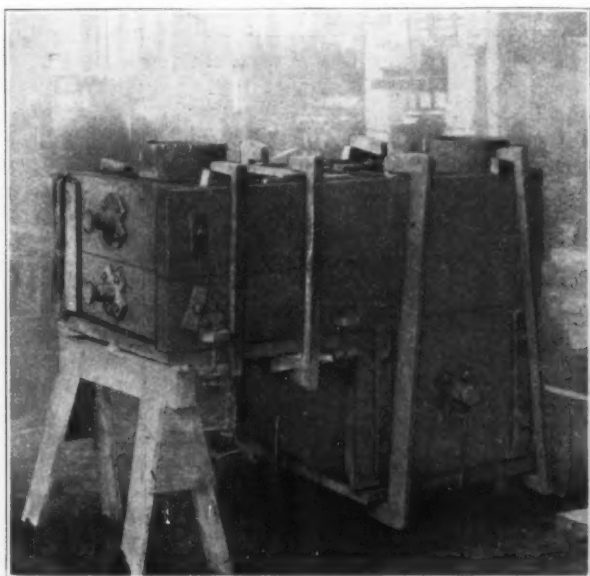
Mold for the Column of the No. 7 Plain Milling Machine.
